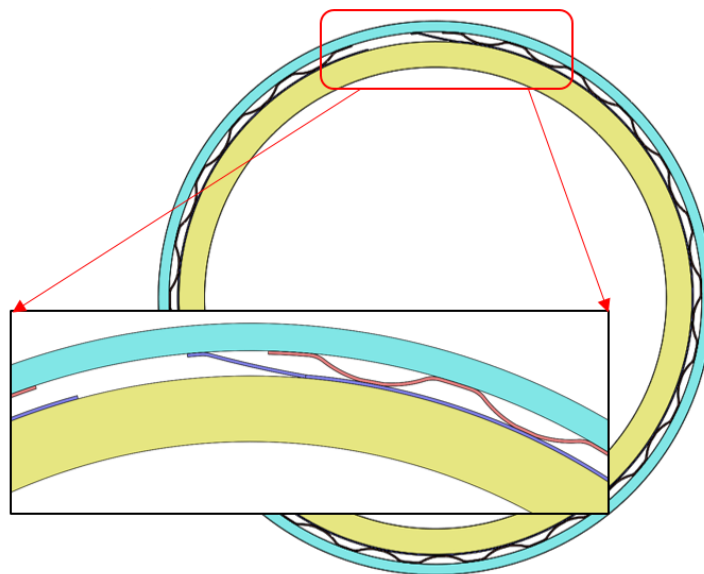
Foil bearing assembly and detailed view for bumps and topfoil
